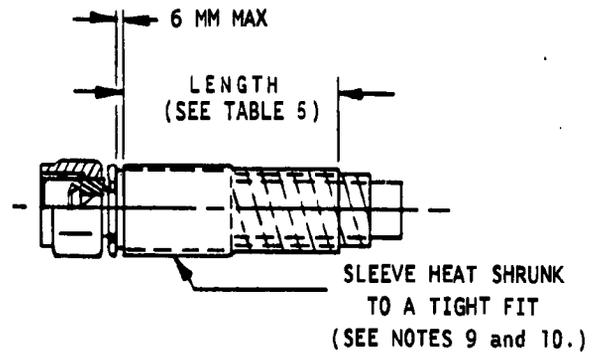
DETAIL OF SLEEVE ASSEMBLY
